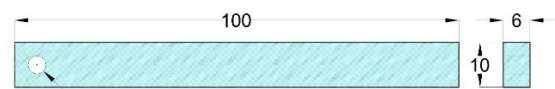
Fatigue Test Specimens with Dimensions (mm).
